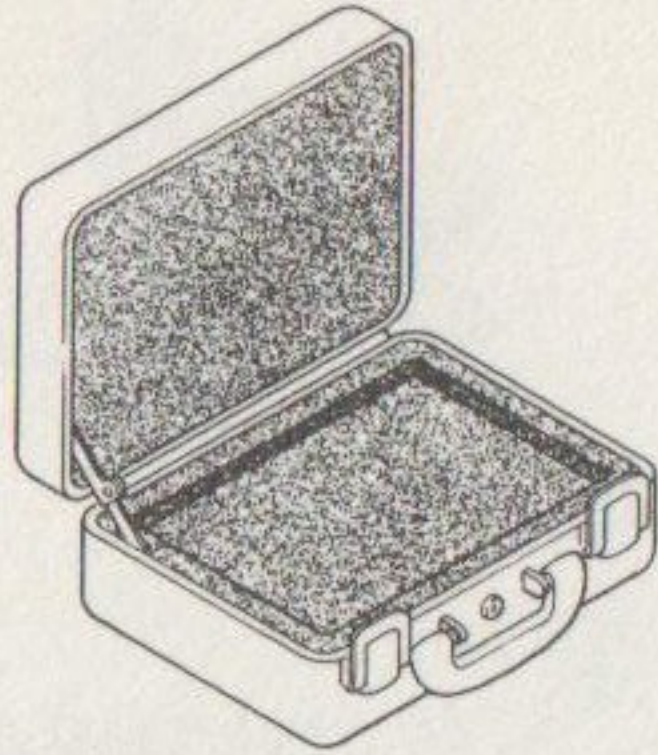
SPECIAL TOOL SET (SHEET 2 OF 3)
